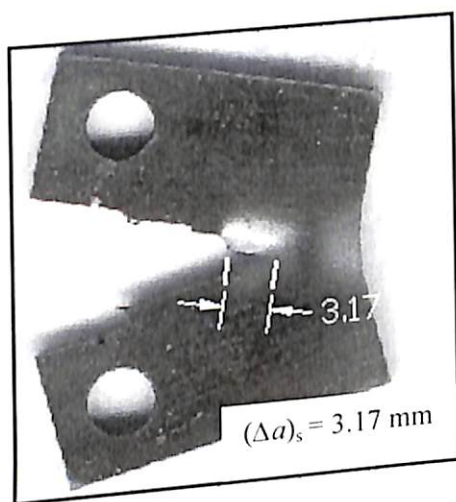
Measurement of ductile crack extension on surface of R4 specimen.
